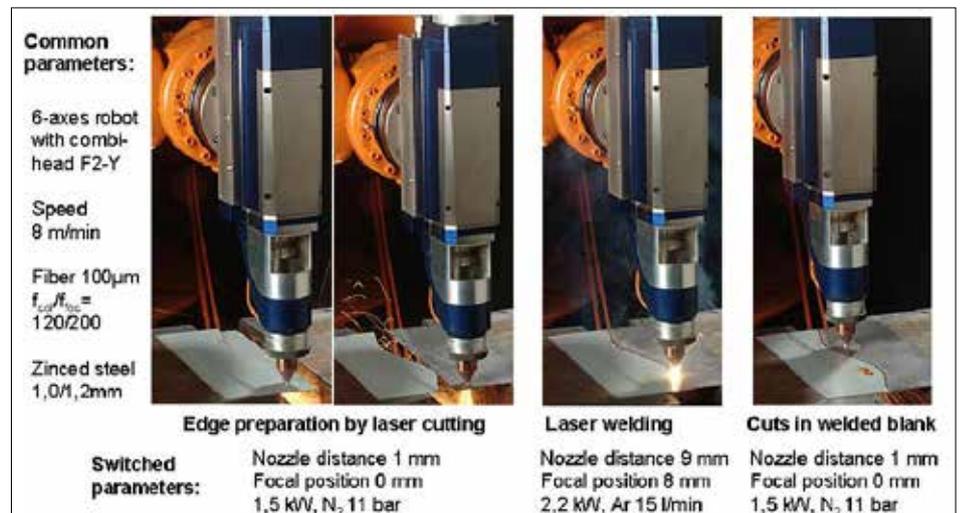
Non-linear TWB process chain using integrated laser cutting and welding with identical path concept
